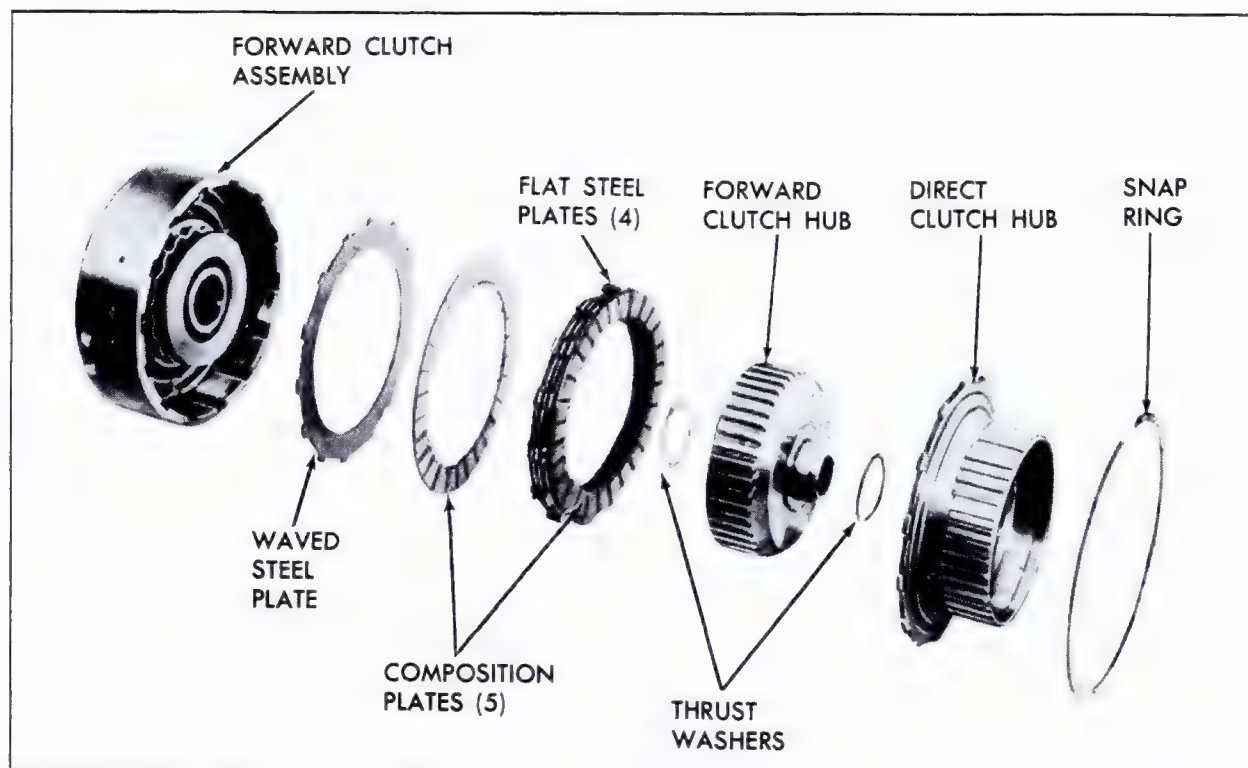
Forward Clutch and Forward and Direct Clutch Hubs Disassembled
